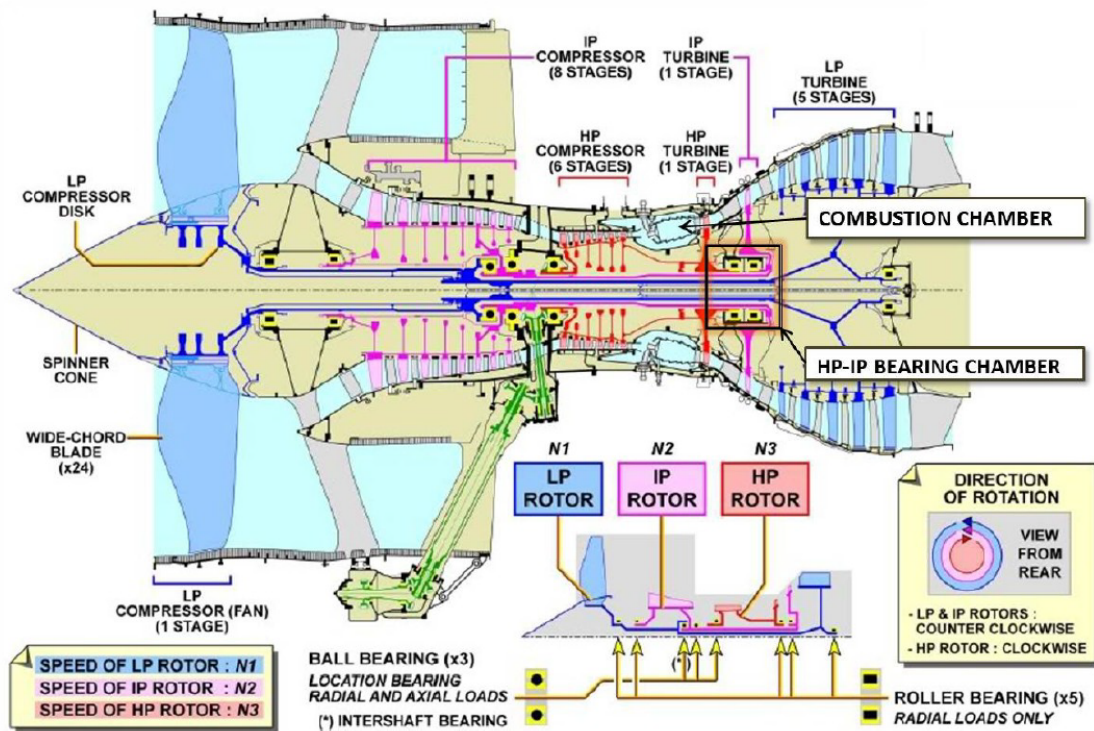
Bearings of the Rolls-Royce 1000 Engine [22]
